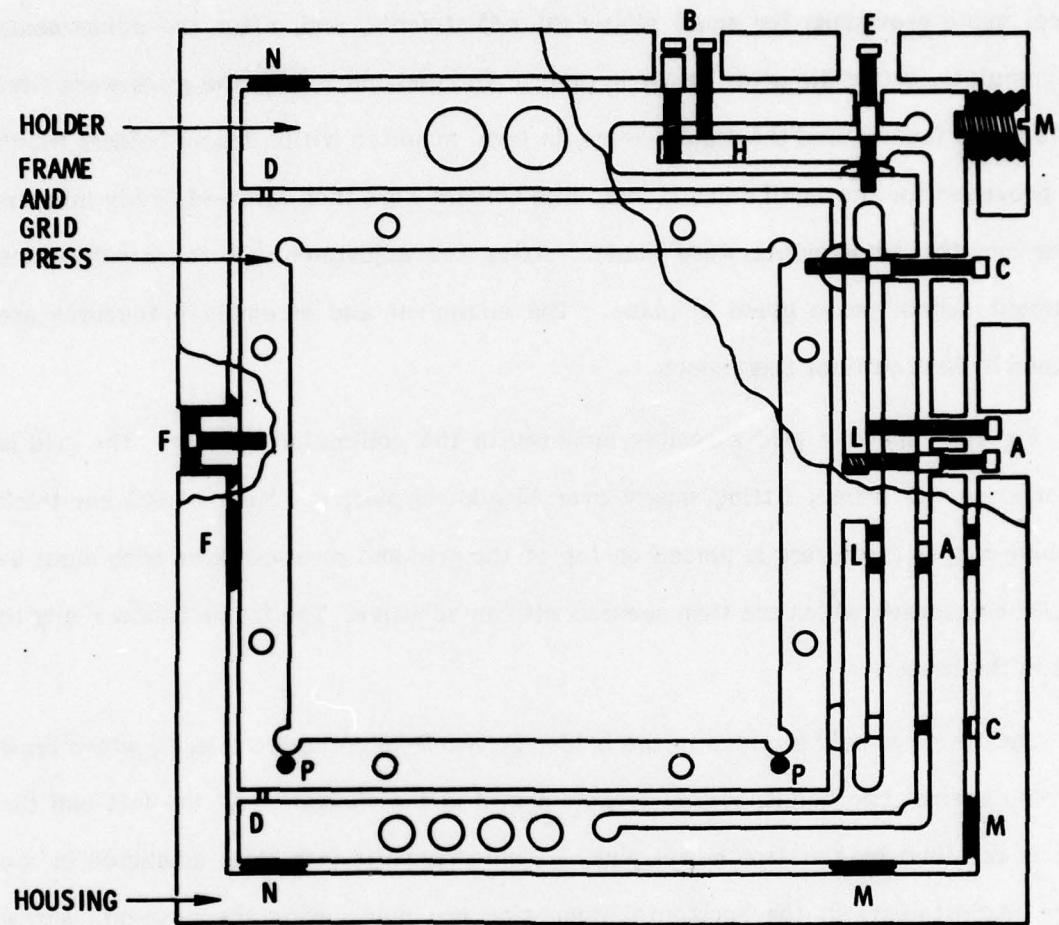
Grid Assembly Positioned in the Collimator Housing with Cut-Aways of Mounting and Positioning Mechanisms
